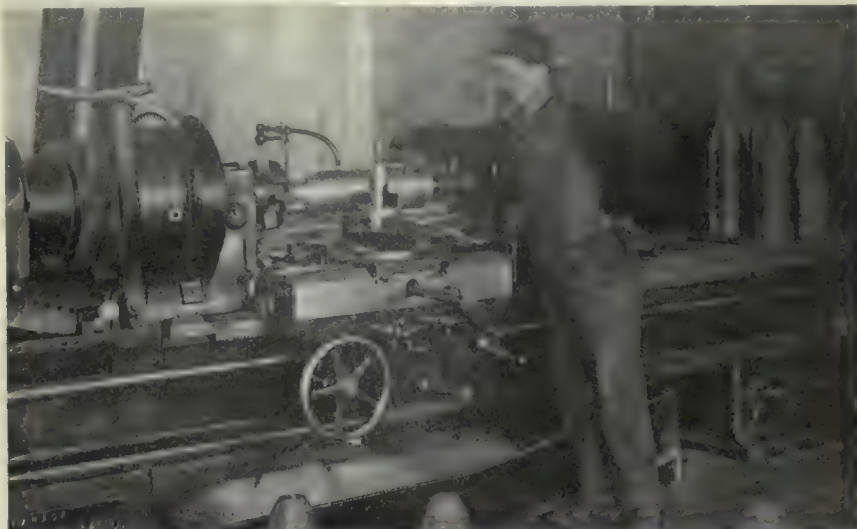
BORING AND THREADING NOSE AND FINISH TURNING 6 IN. SHELL BODY.
